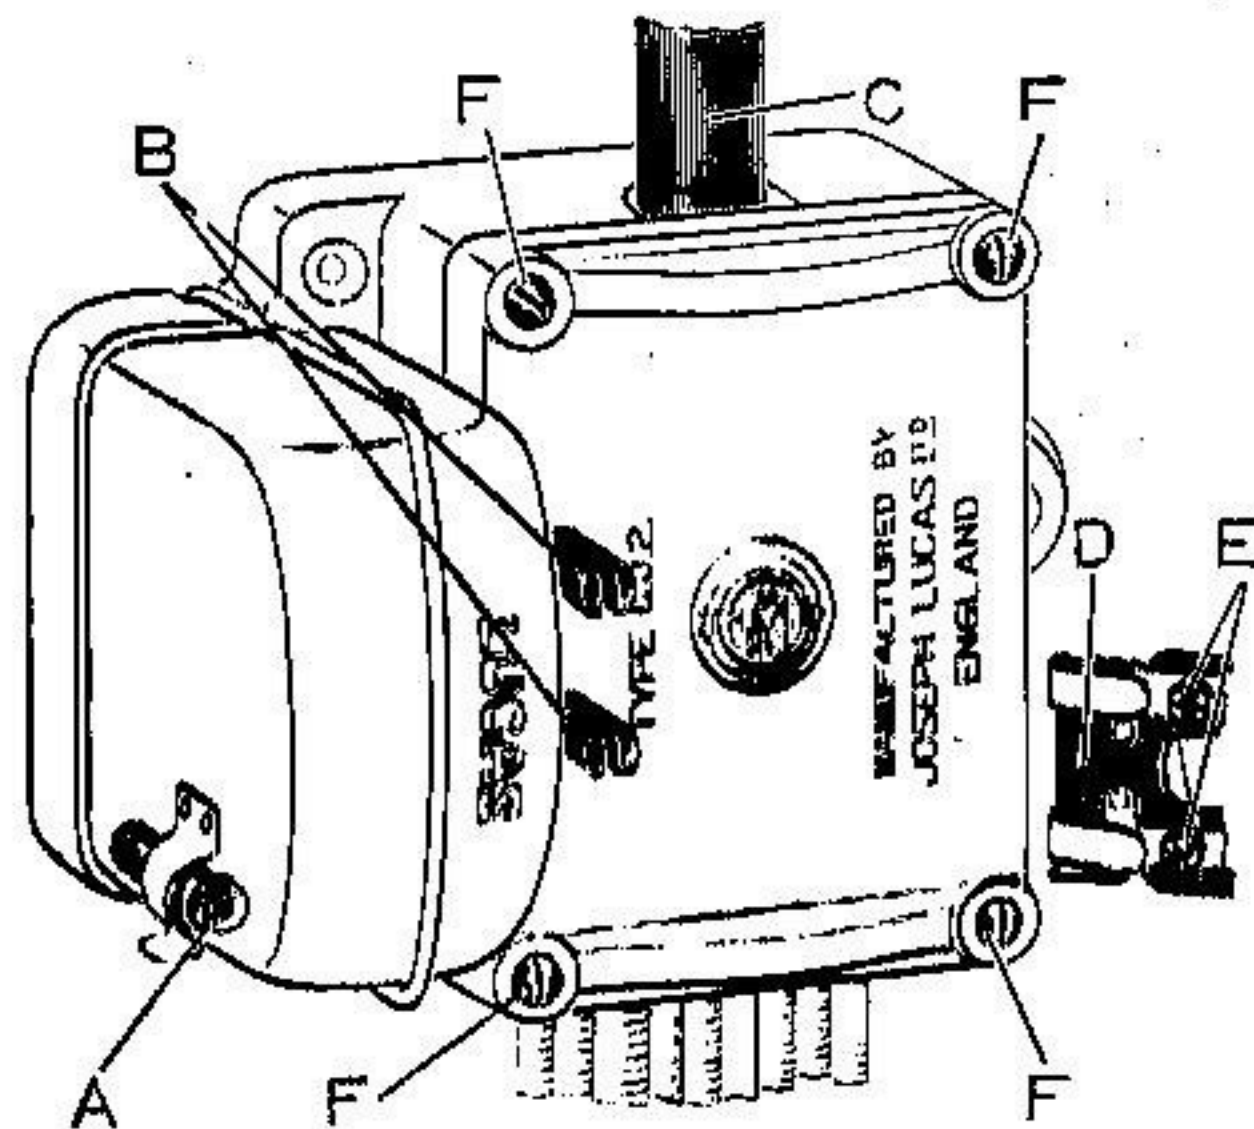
VIEW OF JUNCTION BOX TYPE CJ WITH FUSE REMOVED.
